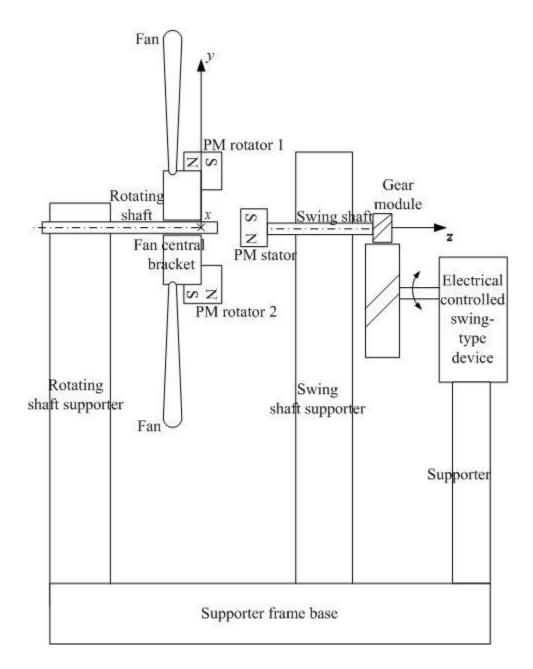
Location of PM rotators, PM stator and gear module in the swing-type PM motor
